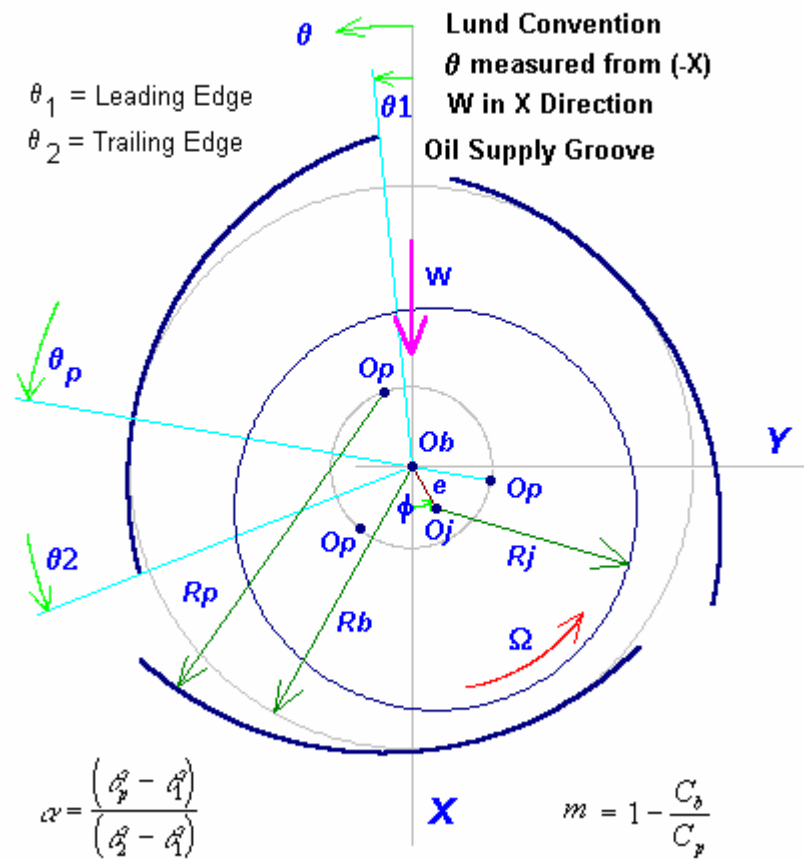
Fixed Lobe Bearing Geometry [7]
